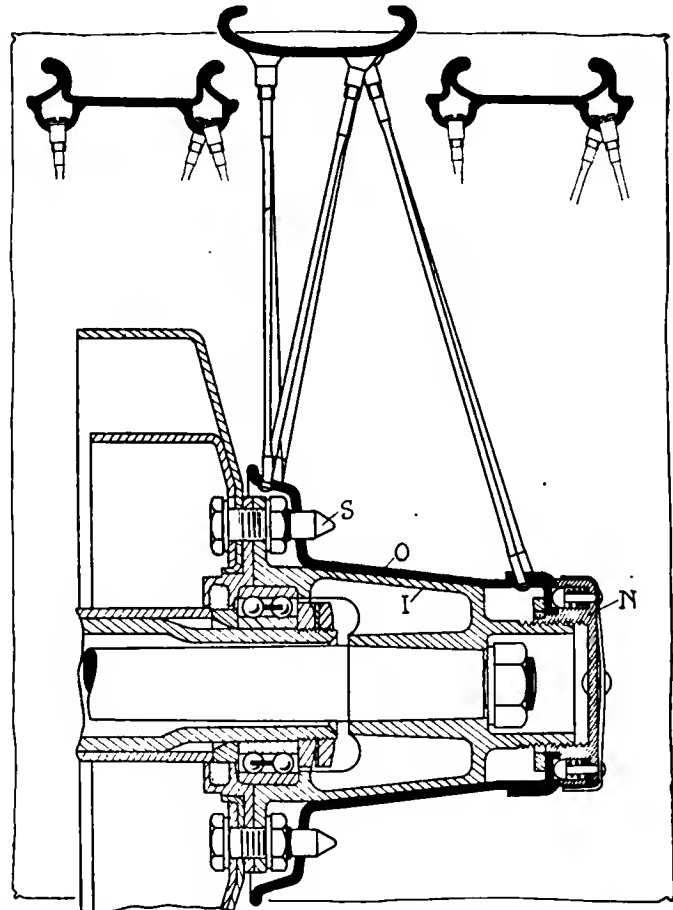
Section through McCue wheel, showing conical hub and method of driving by spligots
